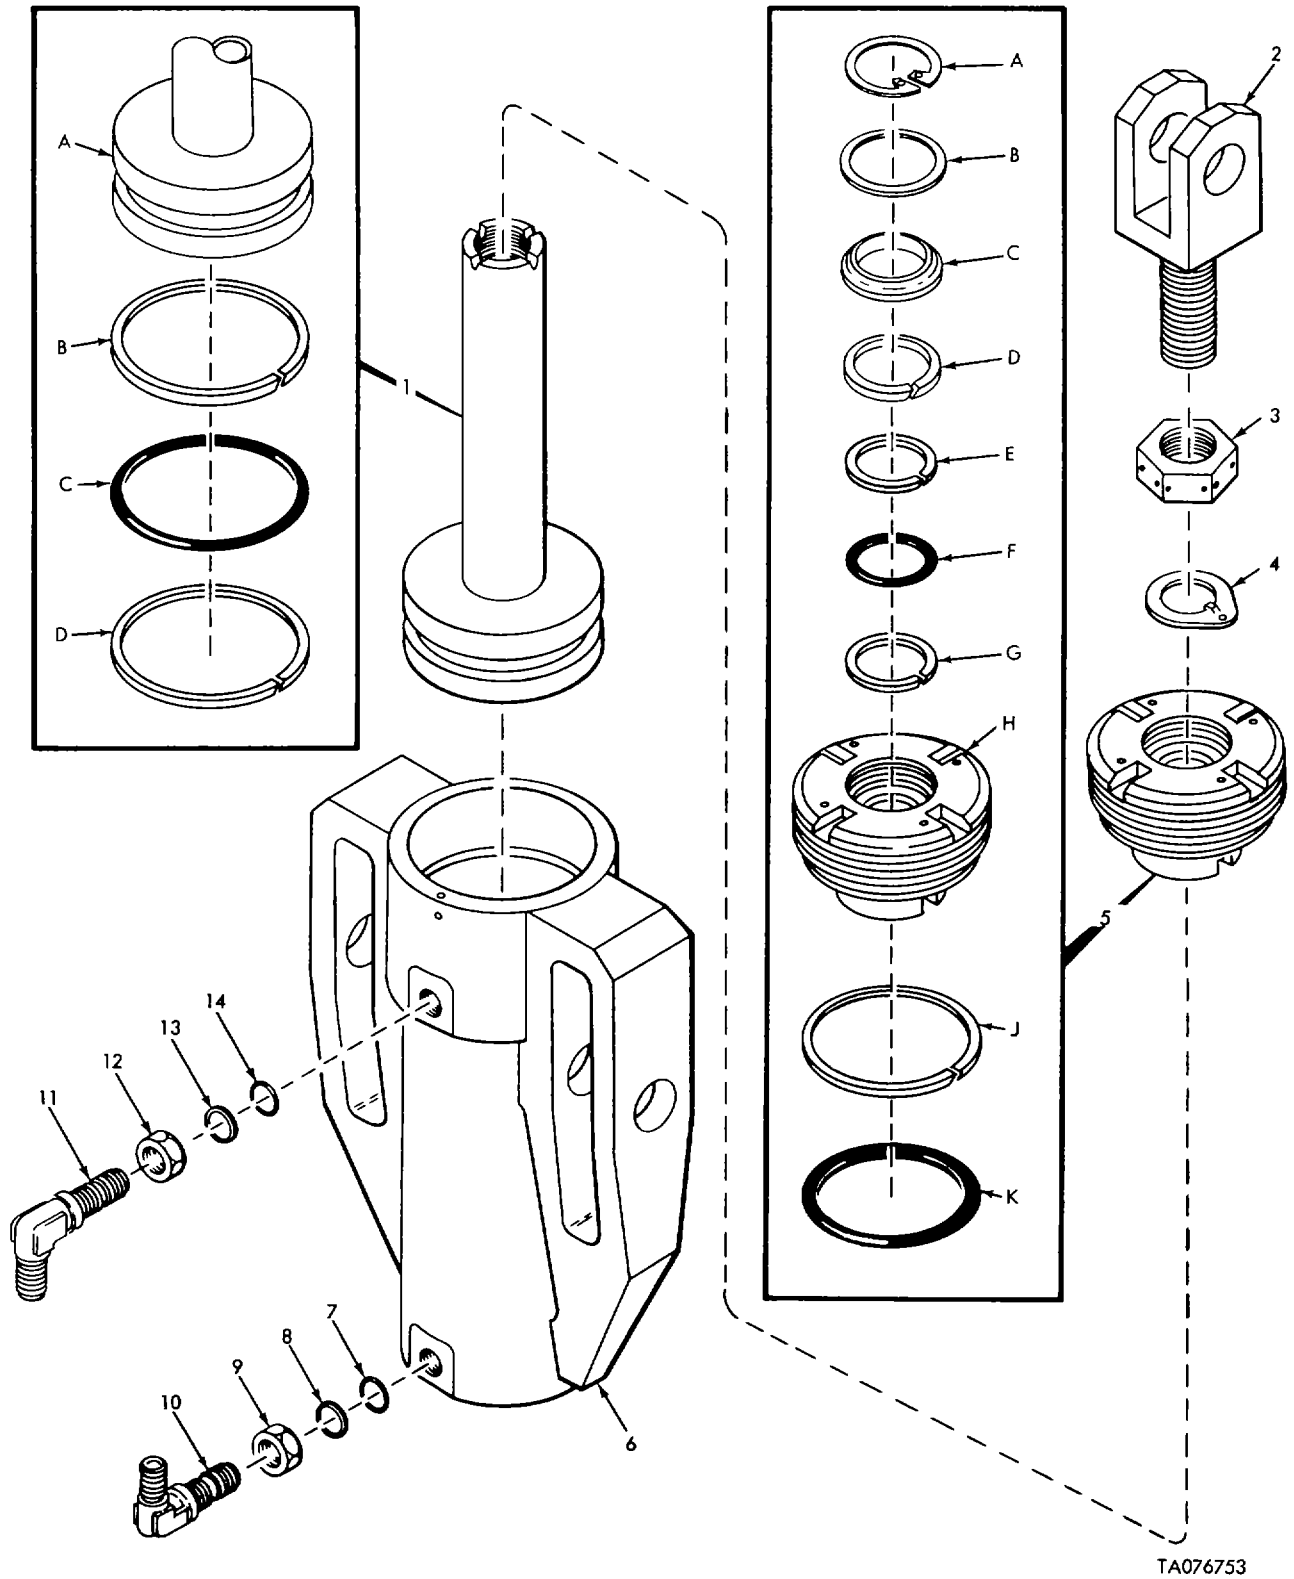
Roll Cylinder Disassembly (Sheet 1 of 2)
